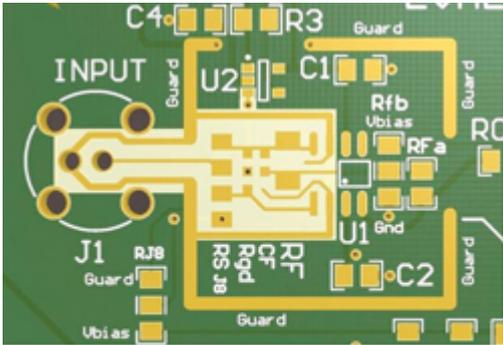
The thick copper trace on this PCB acts as a guard ring. The goldplated traces prevent corrosion. Remove the solder mask in the guarded area to reduce leakage.
